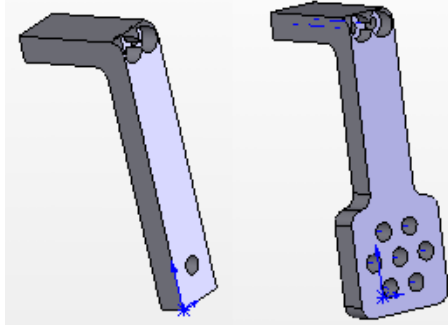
Shoulder Arch side parts redesigned for easier fixturing in CNC machine
